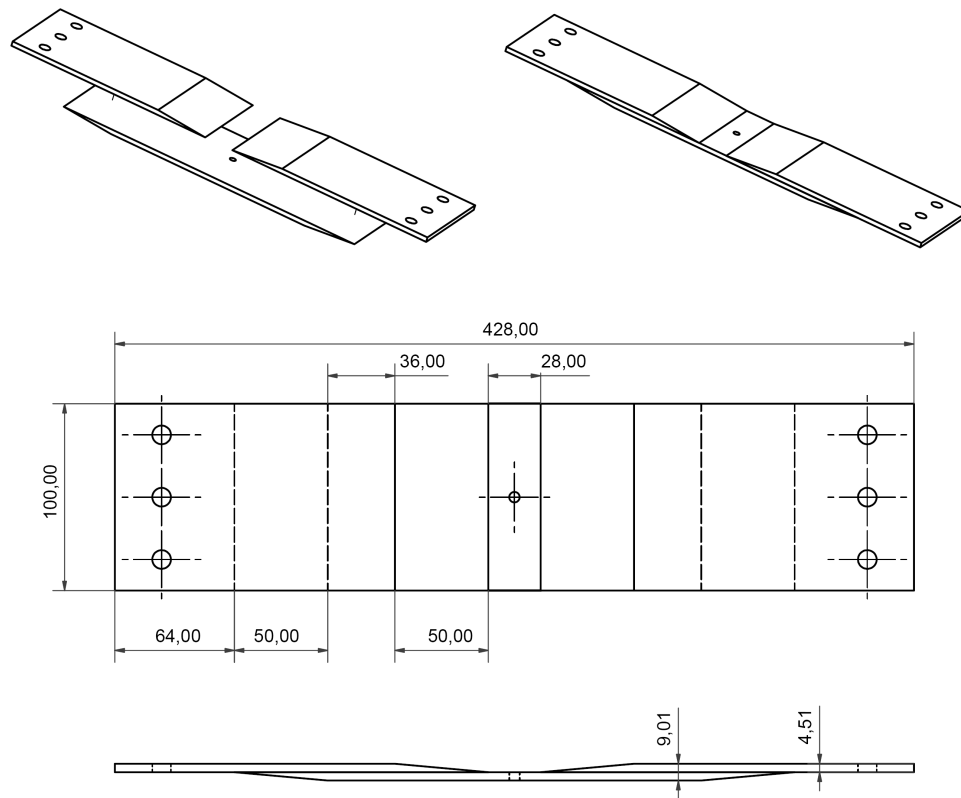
Milled Open Hole Tension Bending (MOHTB) specimen.
